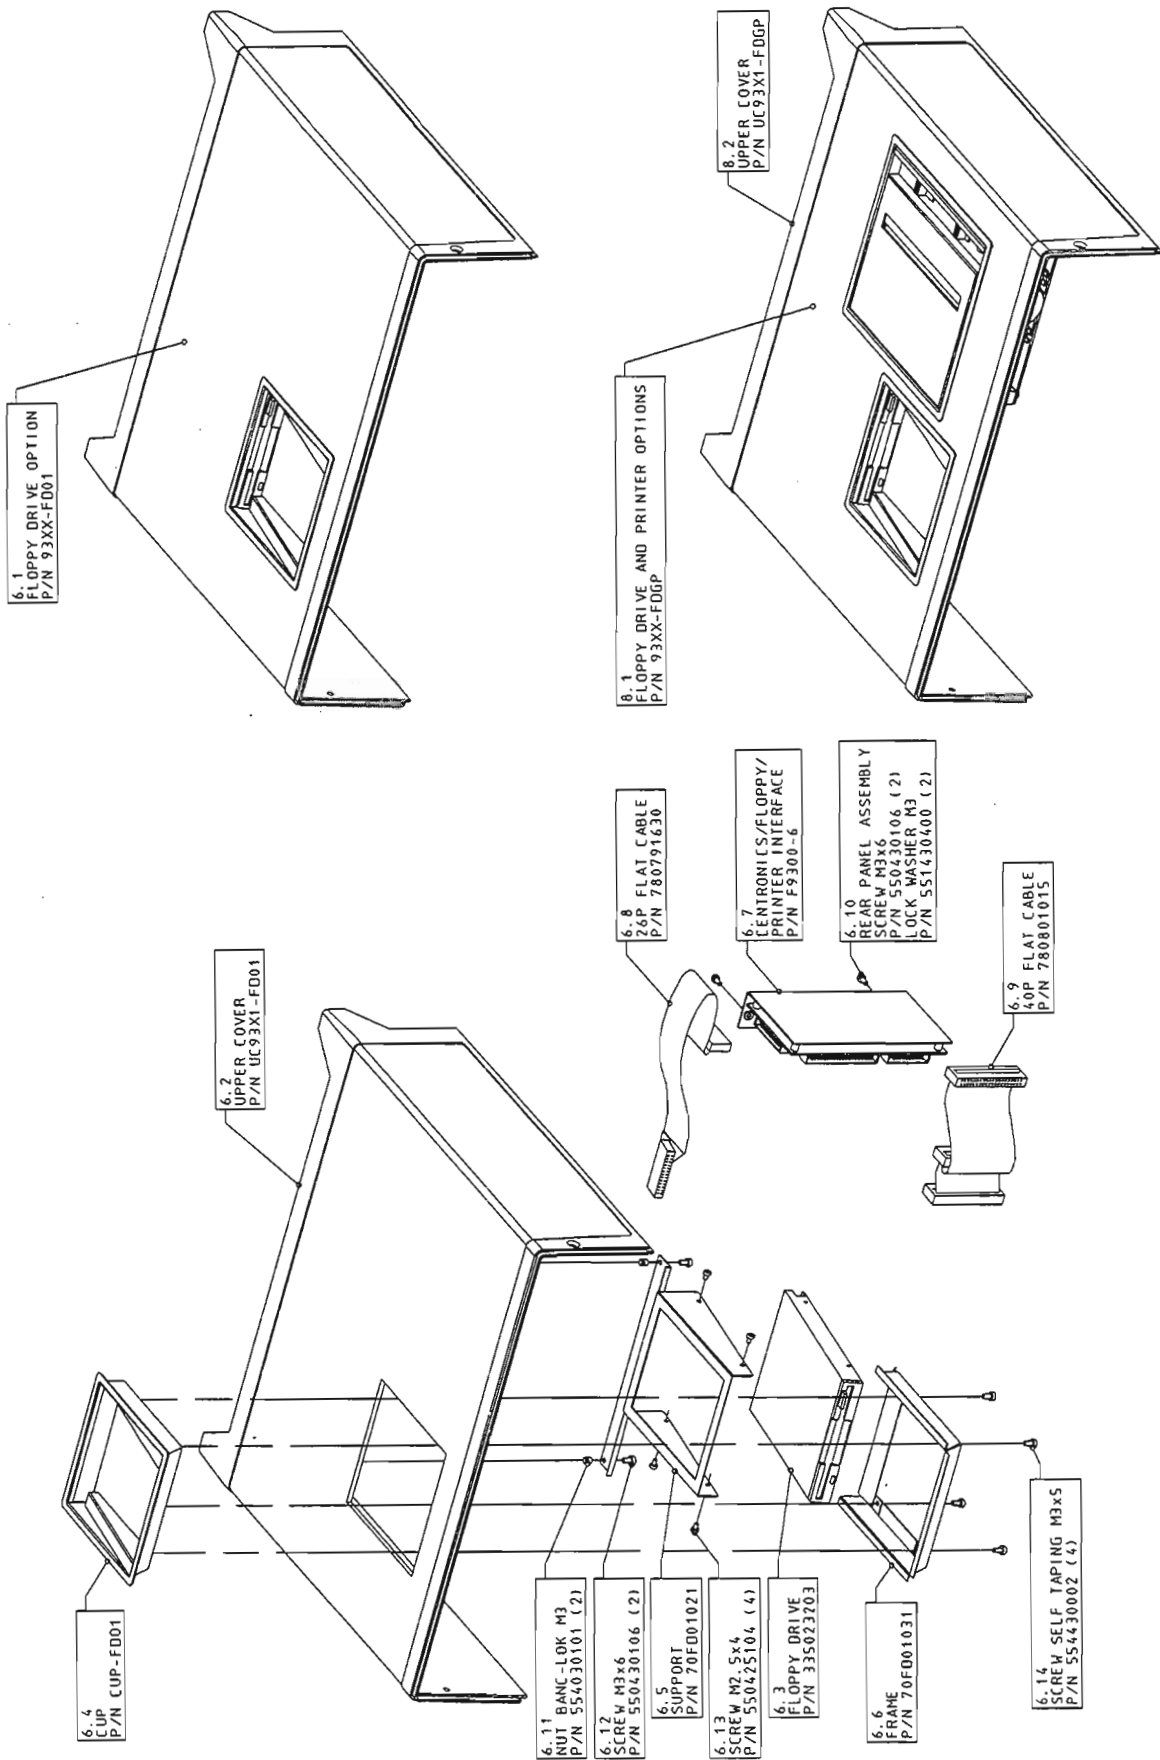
Floppy Drive Assembly P/N: 335023203
